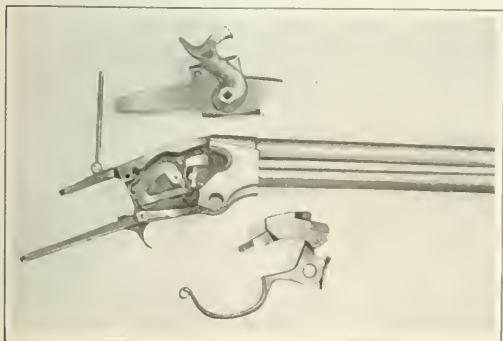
Loading Mechanism of Ball's Rifle partly disassembled
